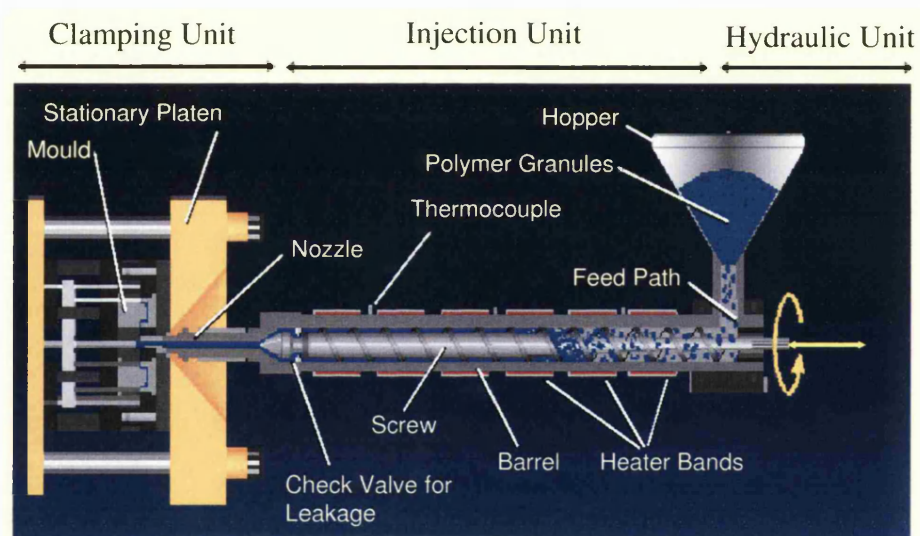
Schematic diagram of the Injection Moulding Machine
